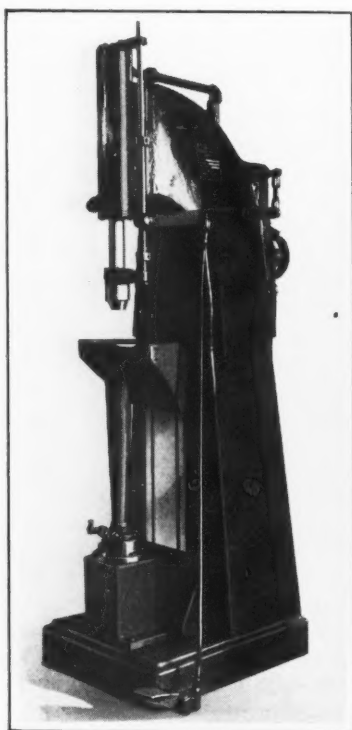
American Hydraulic Press Designed for Assembling Timken Races in Axle Housings
